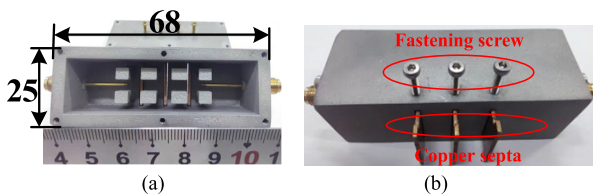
Printed samples of (a) filter I. (b) filter V.
